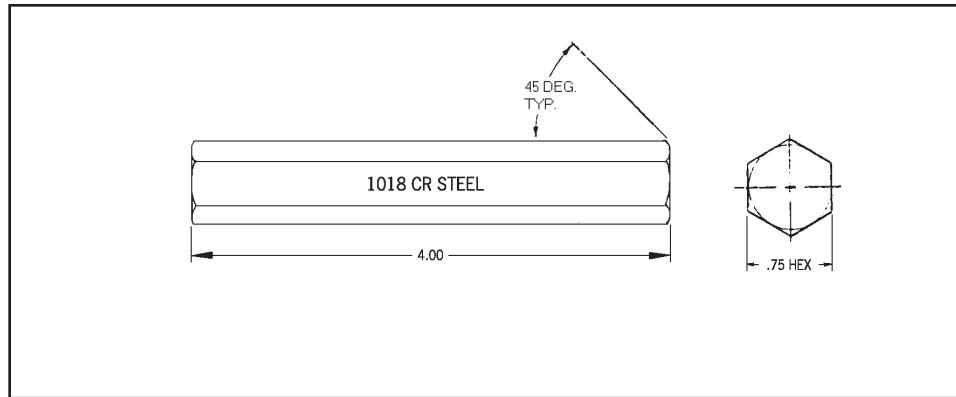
Hex Bar (1416210)–Used to remove and install accumulator bolts.
